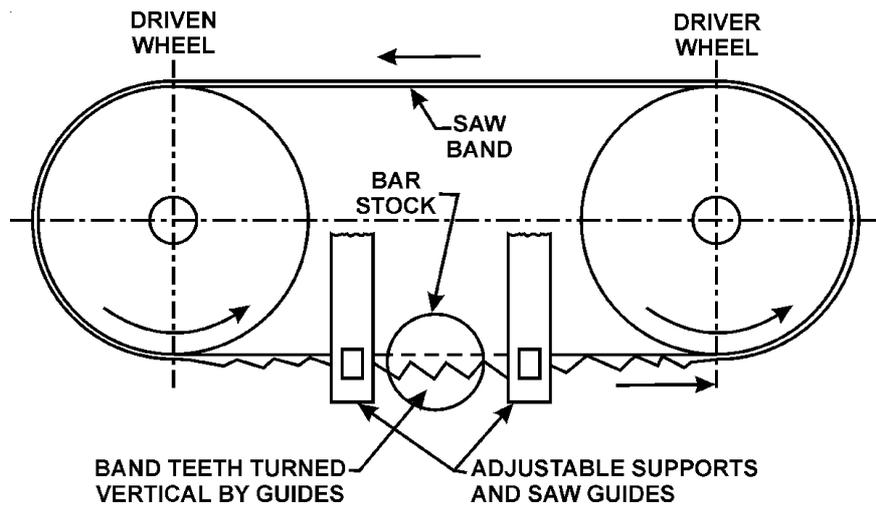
, Principle of operation of a horizontal bandsaw machine.
